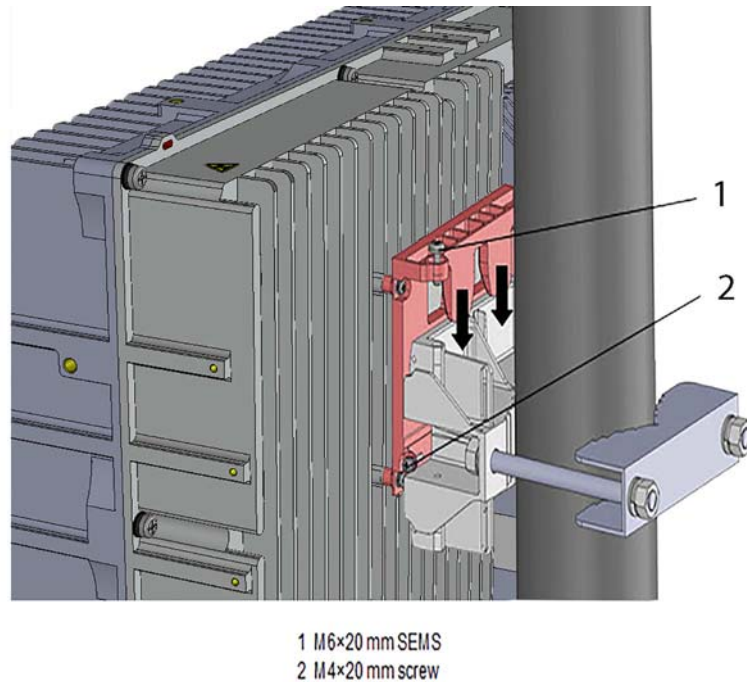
Aligning mounting plate tabs to mounting bracket
